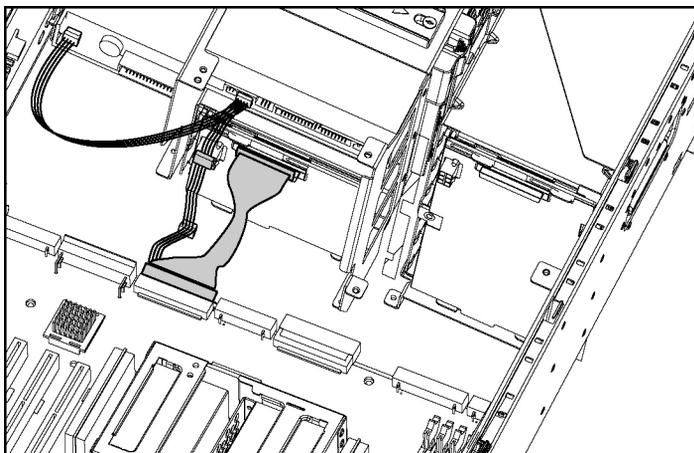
Cabling an optional internal two-bay hot-plug SCSI drive cage
